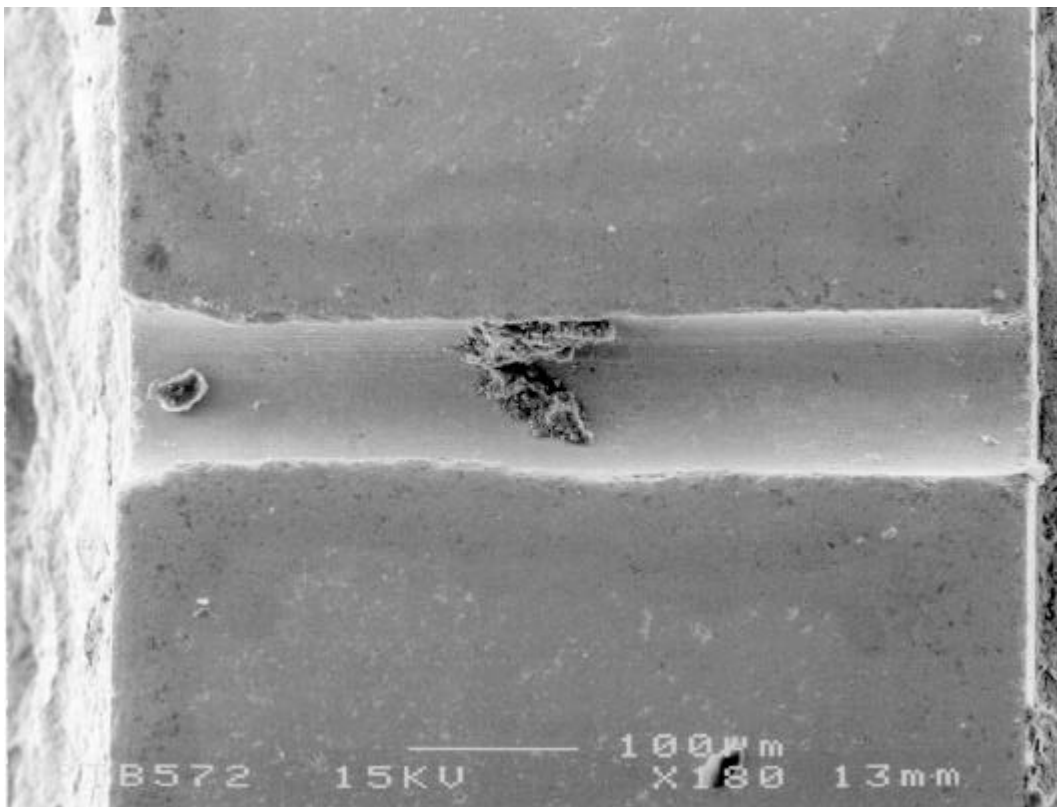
REM shot of a cut ring gauge (0,1 mm in diameter)
